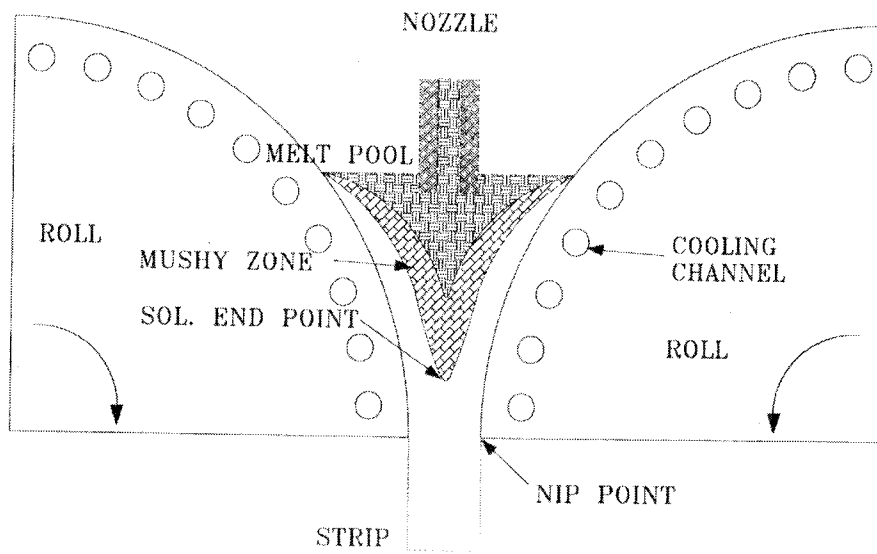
Schemetic diagram of twin roll strip casting process
